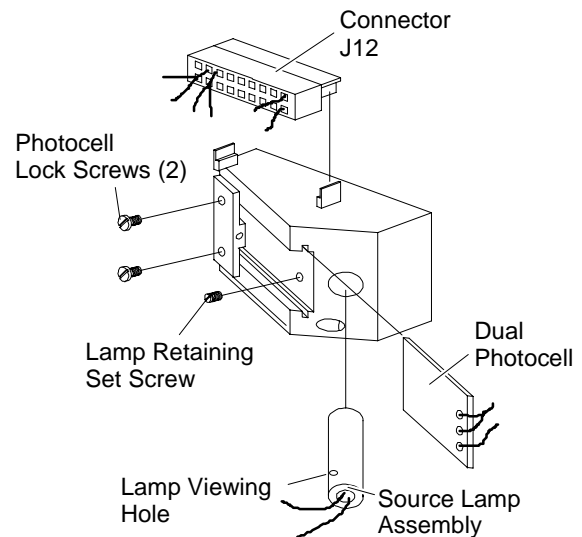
DETECTOR/MAGNET ASSEMBLY
